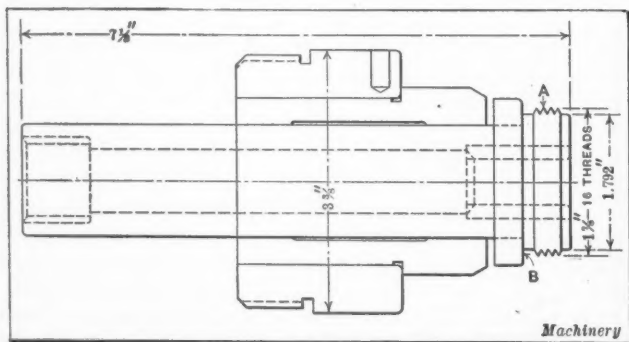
Special Threaded Mandrel connected with Spindle Draw-in Mechanism for holding Clutch Flange Nuts of the Type shown in Fig. 3
